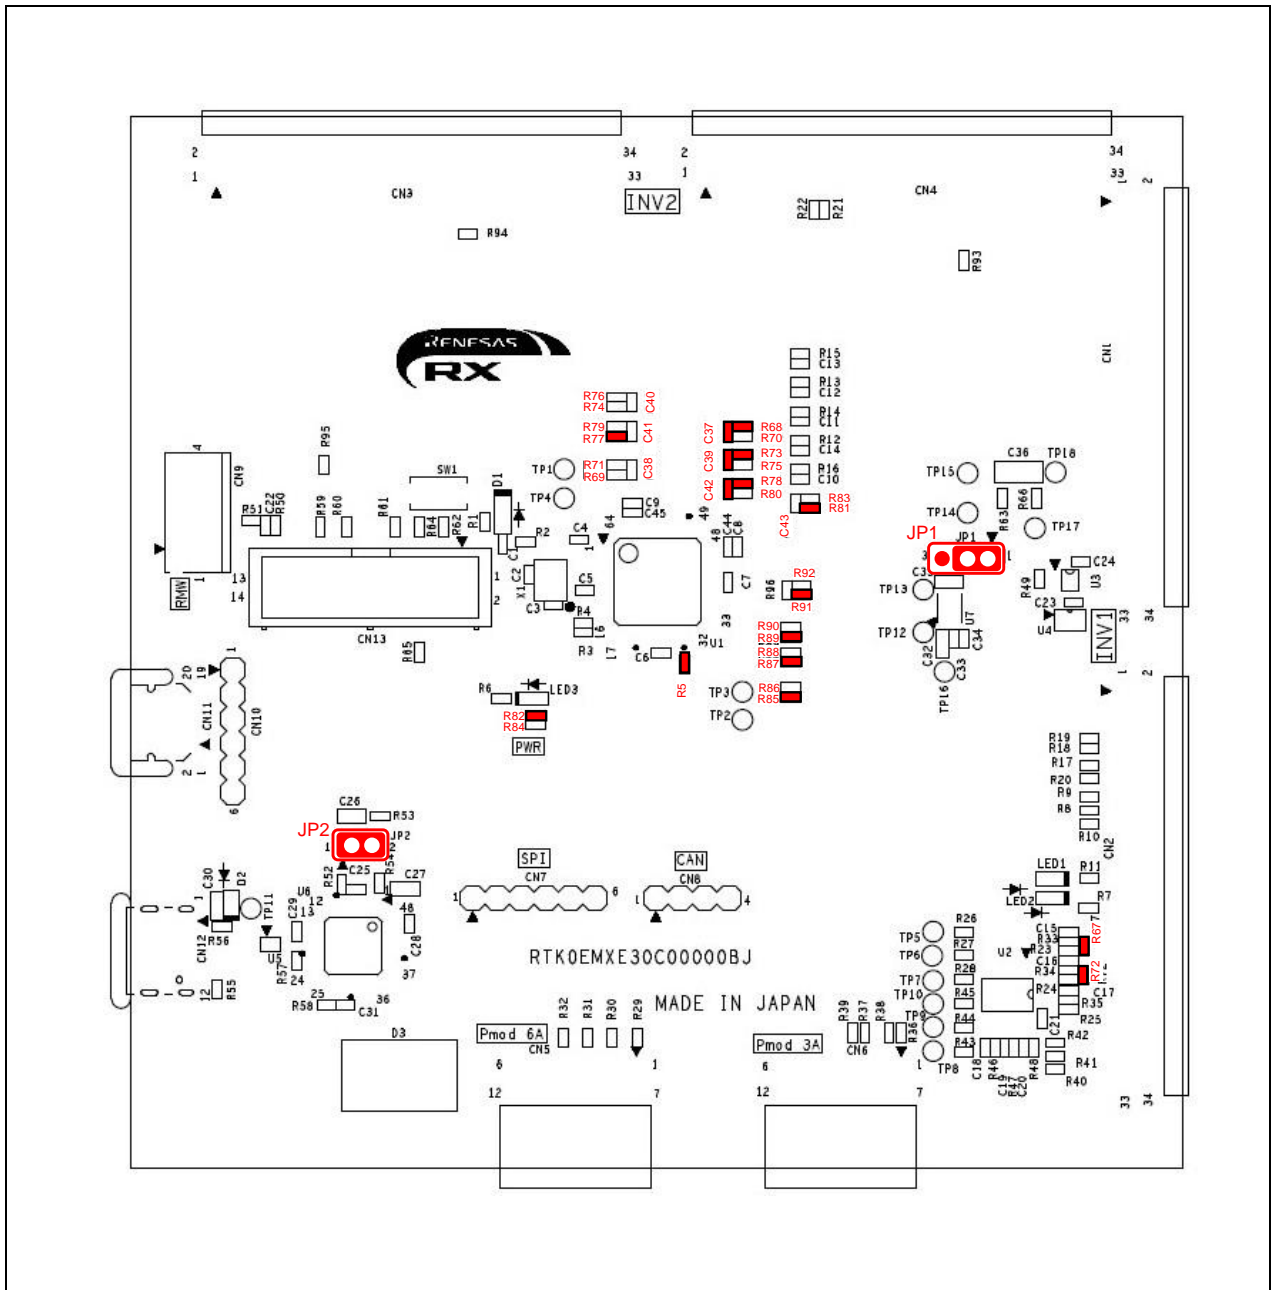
Default jumper pin and jumper resistor, LPF setting
